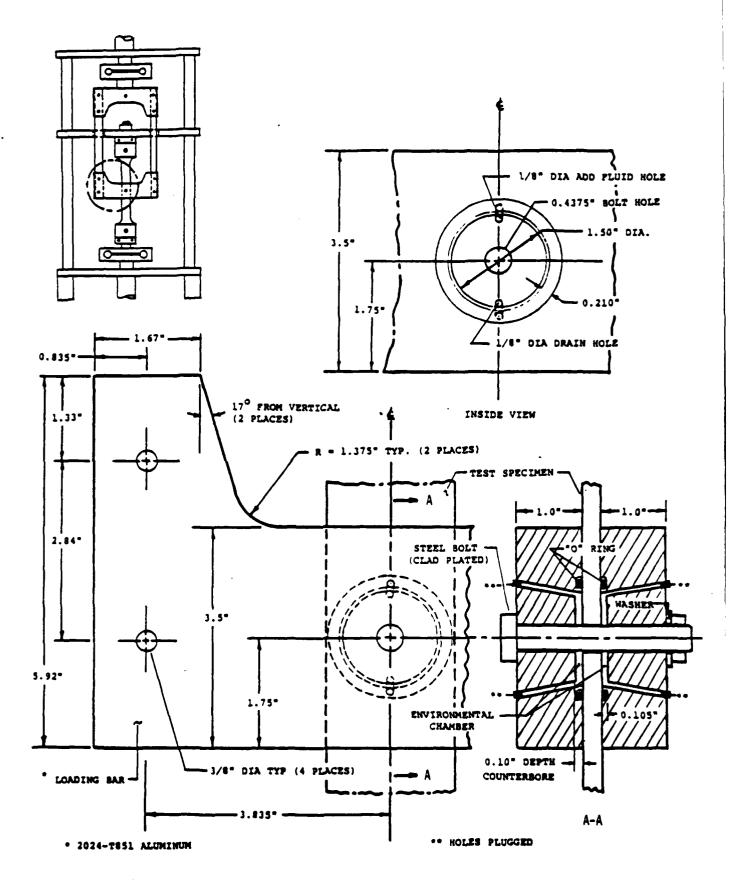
Details of Integral Environmental Chamber Used In Loading Bar for Bolt Load Transfer Tests
